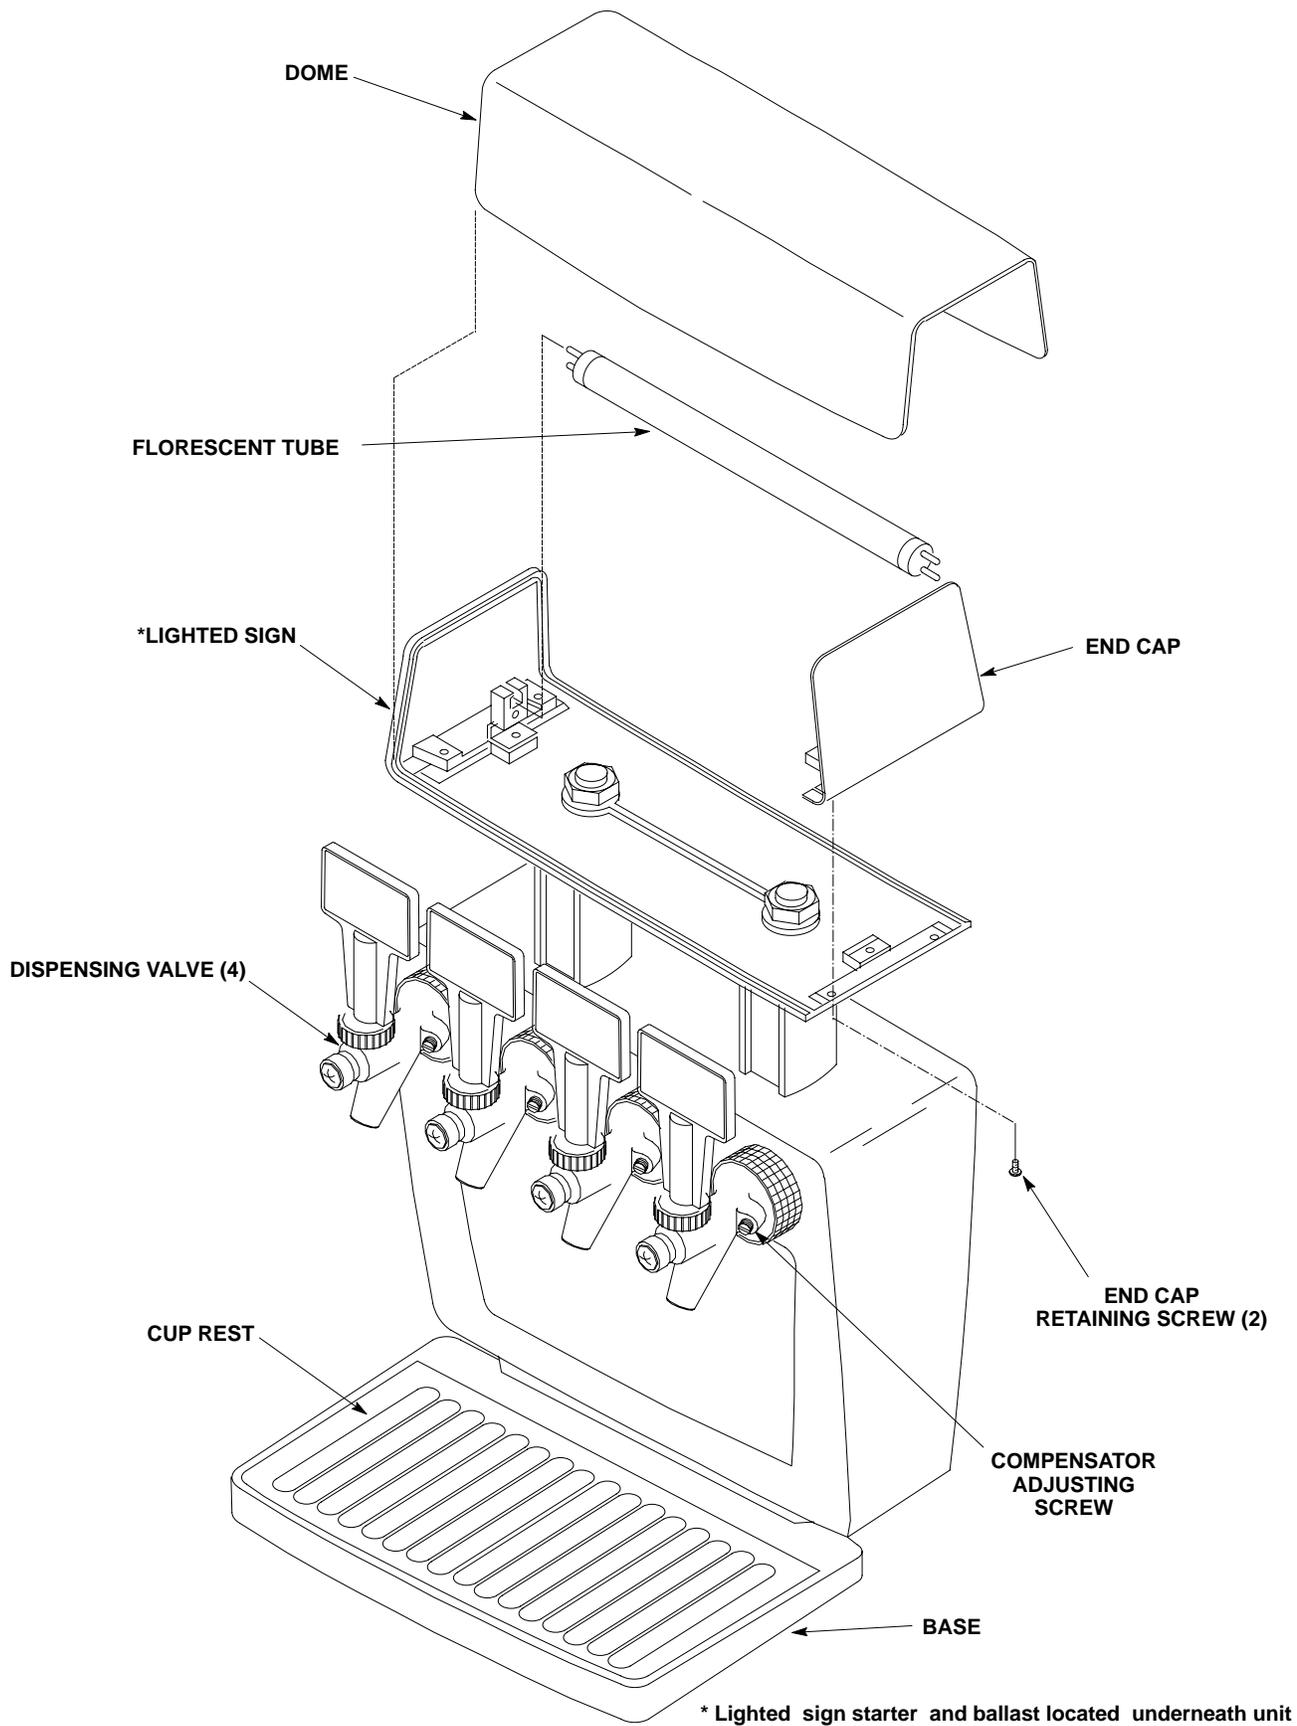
PARTS IDENTIFICATION (LIGHTED SIGN MODEL SHOWN)
